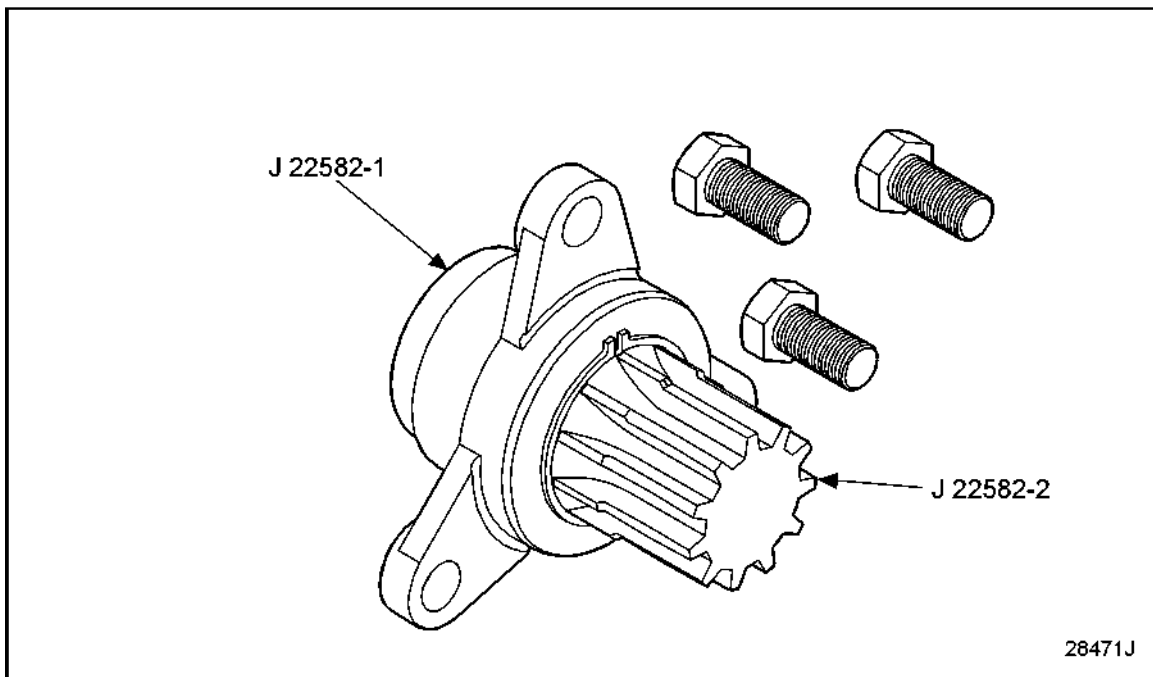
Barring Tool (Starter Mounting Pad), J 22582
